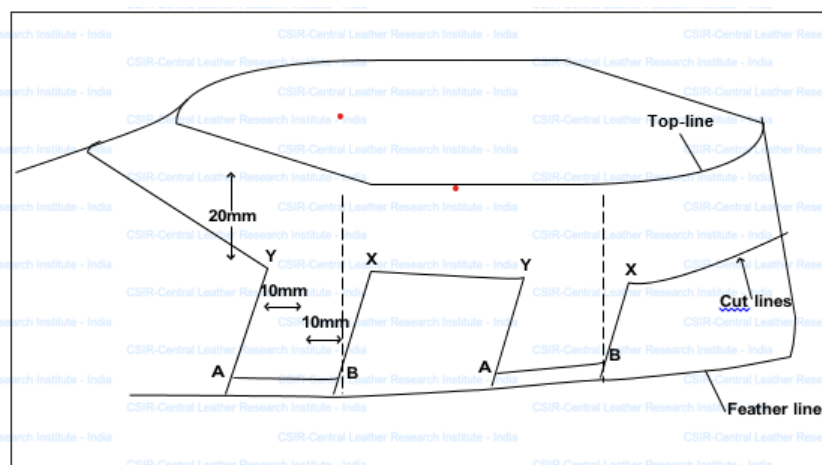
CUTTING OF TEST SPECIMEN FROM UPPER
